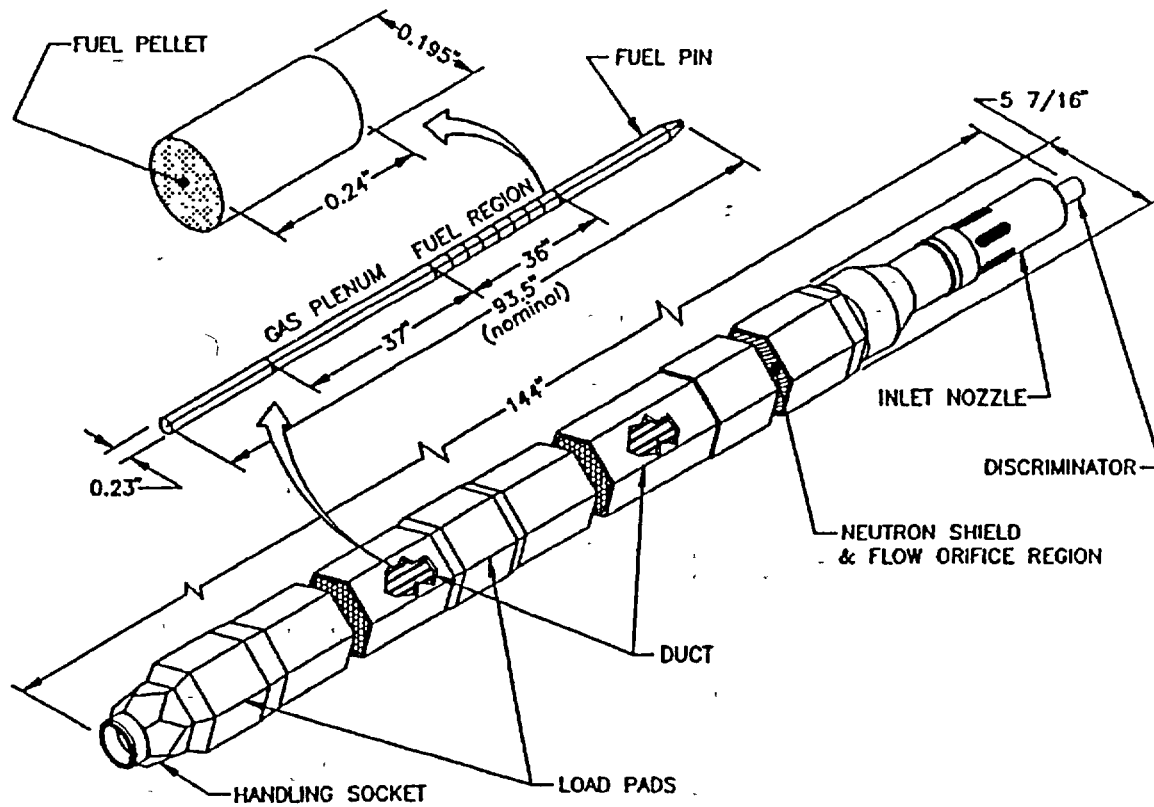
Fast Flux Test Facility standard driver fuel assembly.
